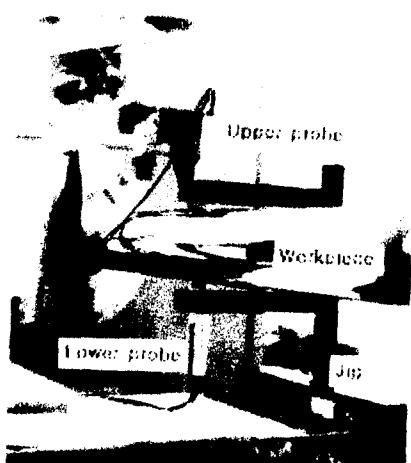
Probes(ST-0505) and Jig for measurement of workpiece
